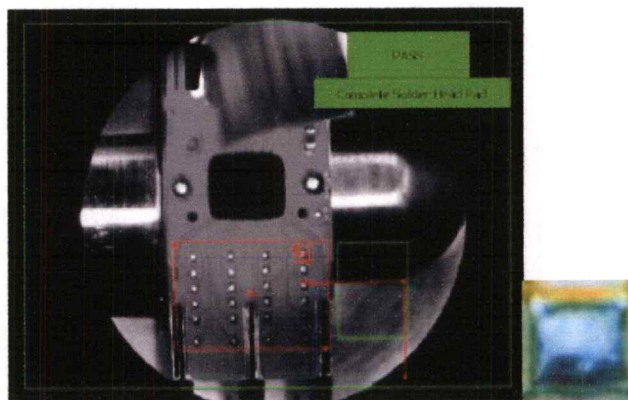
Acceptable parts solder coverage more than 80% [5]
